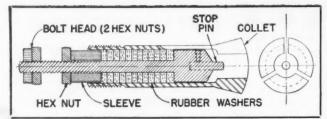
Sketch of internal stop for use with spindle - nose mounted collet closer
